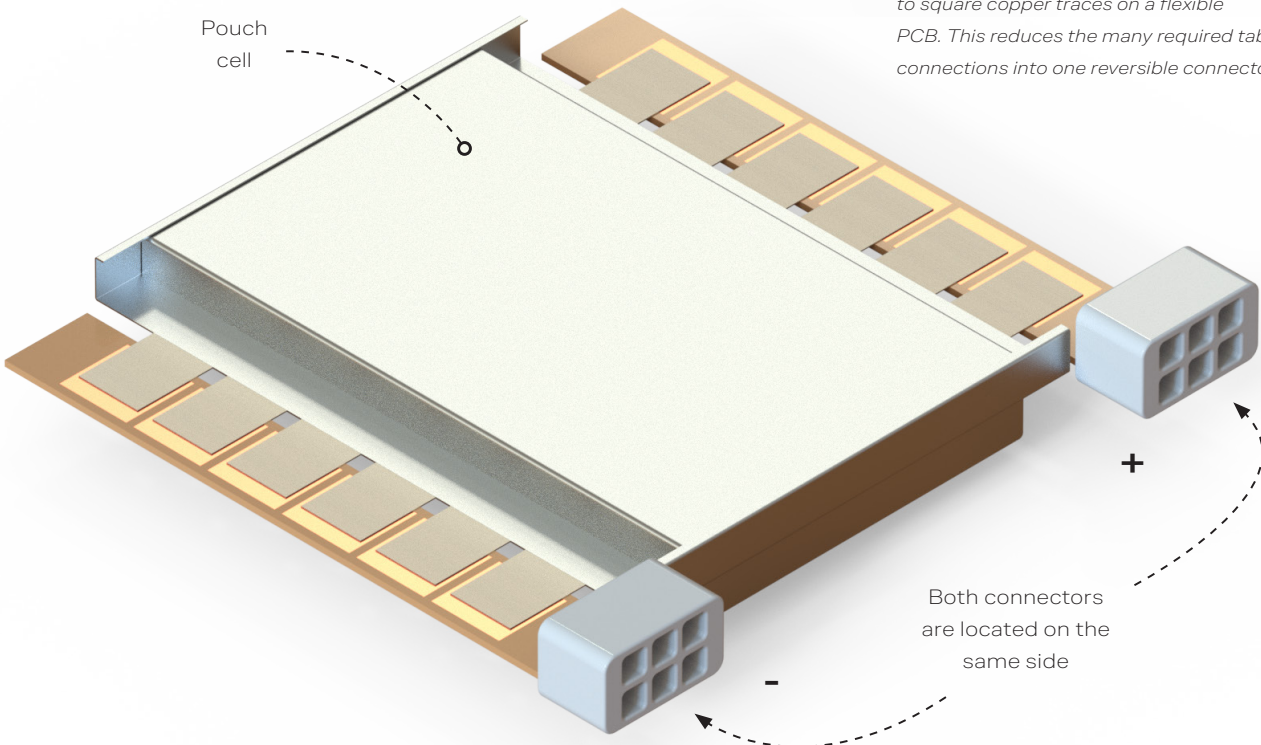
pouch cell with the laser-welded Flex PCB tab connector on each side.
